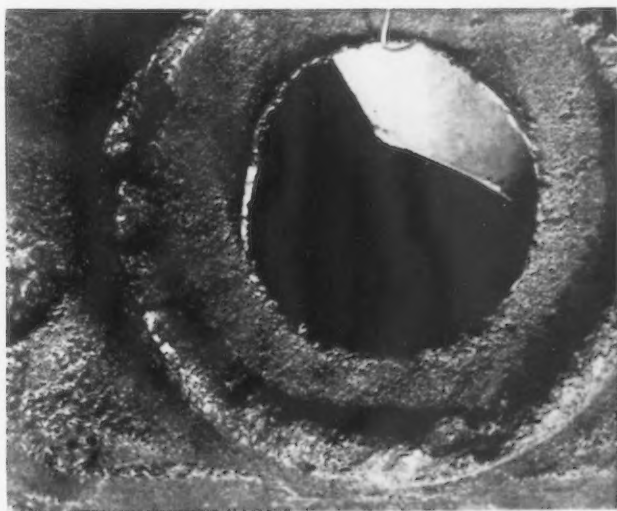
Gas explosions in mold loosen sand on surface of the mold which dropped into the drag of the mold causing surface of casting to be pitted.
